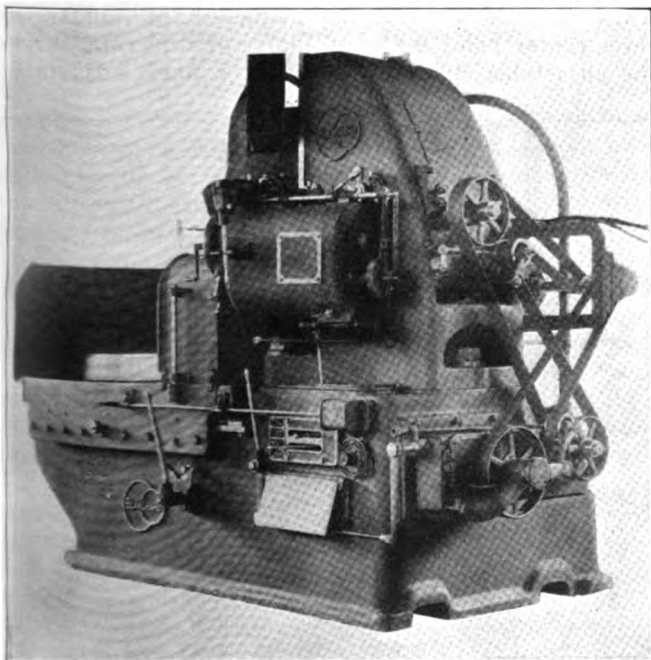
RIGHT-END FRONT VIEW OF BLANCHARD GRINDING MACHINE. FIG. 3. REAR VIEW
